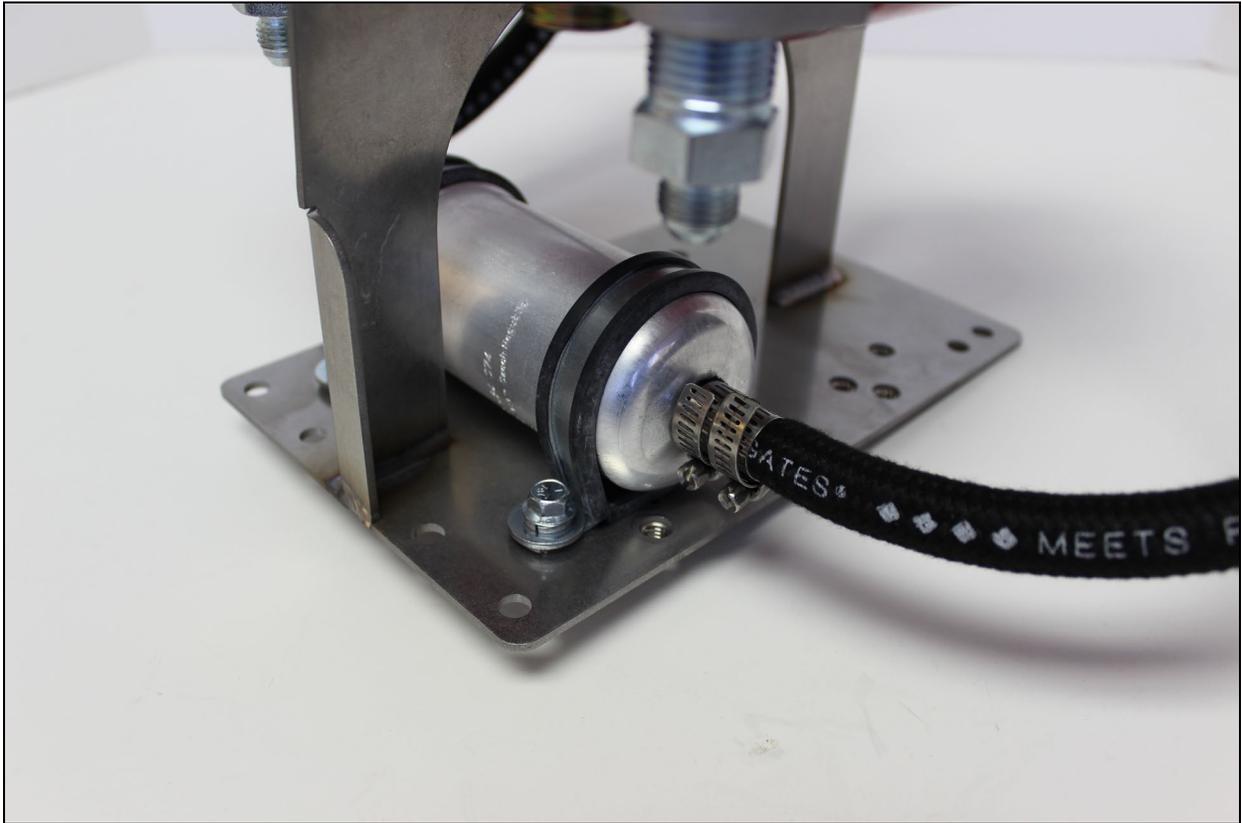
FUEL PUMP MOUNTING & FUEL INLET HOSE CONNECTION
